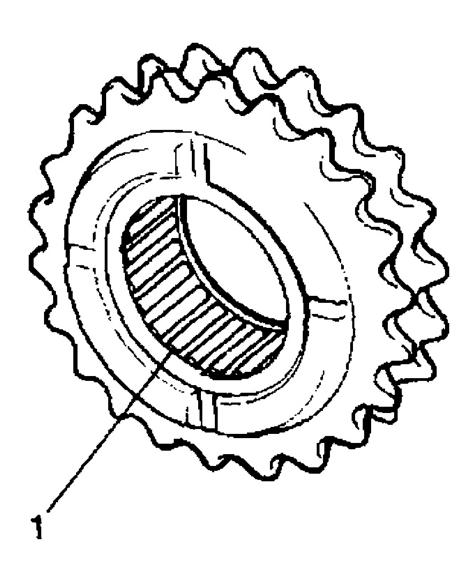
Checking RH Bank 1st Timing Chain Intake Camshaft Sprocket Courtesy of SUZUKI OF AMERICA CORP.
